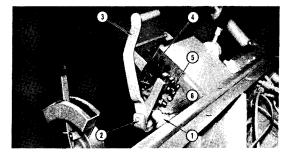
QUICK RELEASE LEVER 1. Air Valve 3. Handle 5. Adjusting Screw 2. Pivot Pin 4. Control Switch 6. Base
